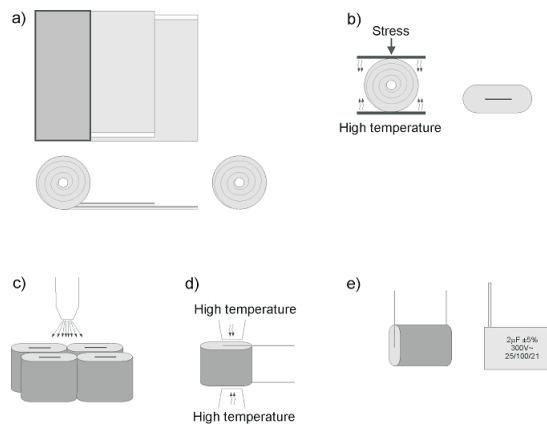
Stages of the capacitor production: (a) winding two one-side metalized foils, (b) baking and shaping, (c) spraying metallized contacts, (d) terminal welding, (e) final packing.
